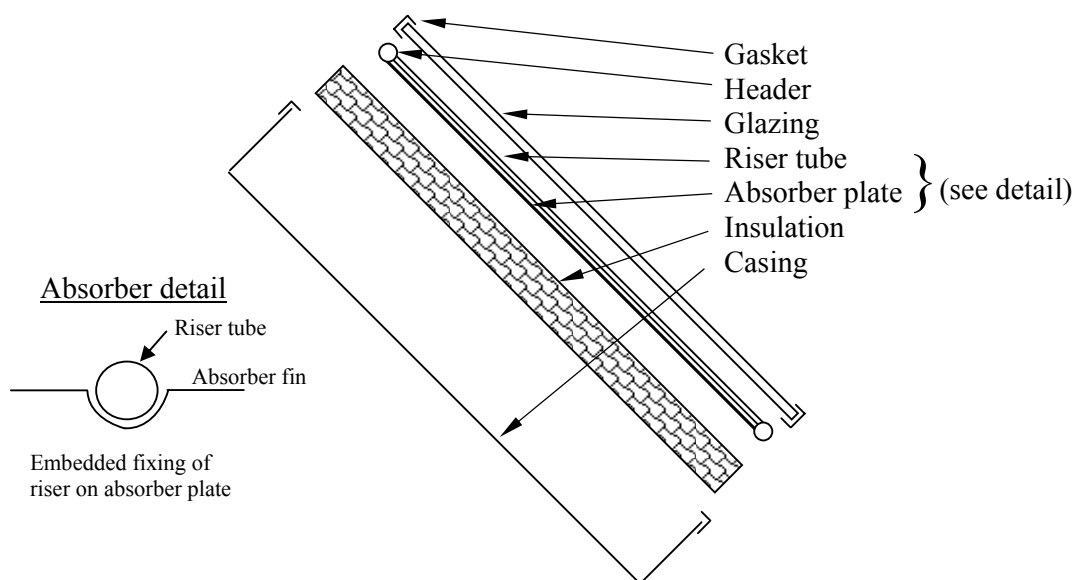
Exploded view of a flat-plate collector and absorber detail
